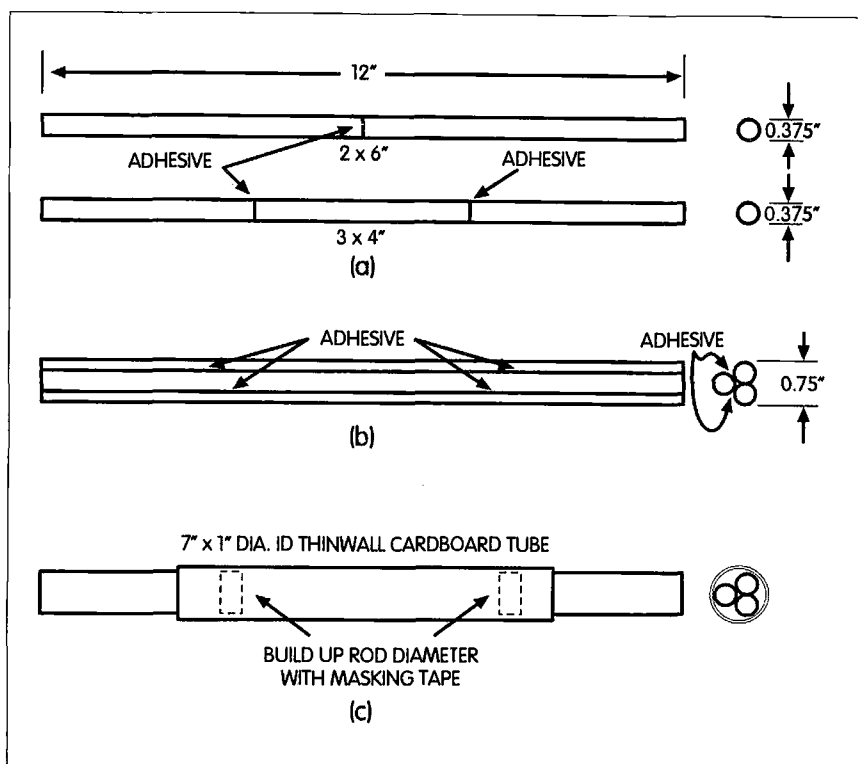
Assembly of 3/4" ferrite rod and coil former for L1. (A) Fabrication of 12" x 3/8"-diameter rods. (B) Fabrication of 12" x 3/4"-diameter ferrite rod. (C) Assembly of coil L1 former on "B".
